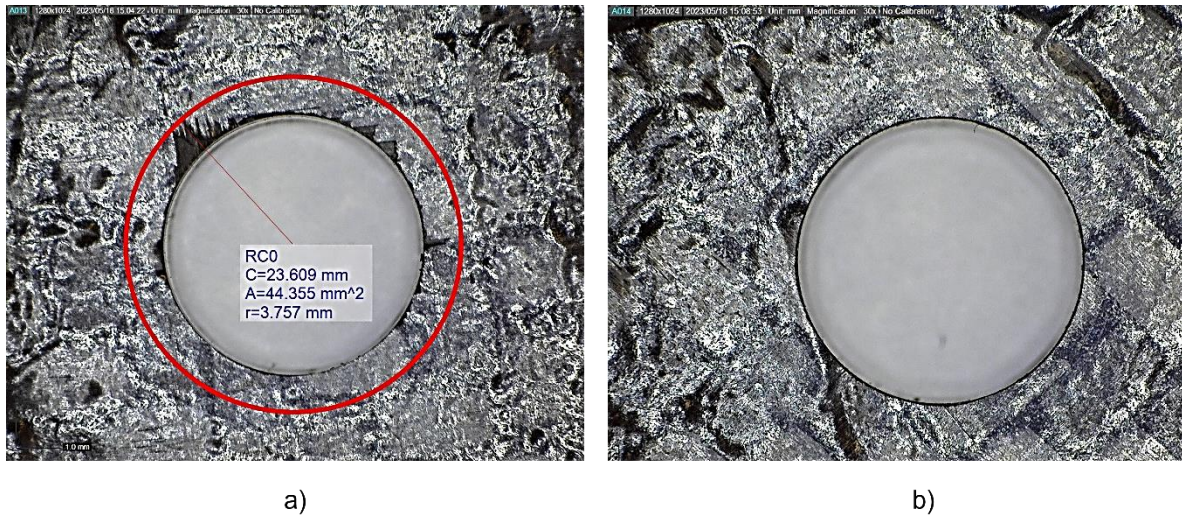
Delamination occurrence in: (a) drilled hole using the drilling tool 1 (with delamination) (feed – 0.05 mm/rev; cutting speed – 300 m/min); (b) drilled hole using the drilling tool 2 (without delamination) (feed – 0.05 mm/rev; cutting speed – 300 m/min).
